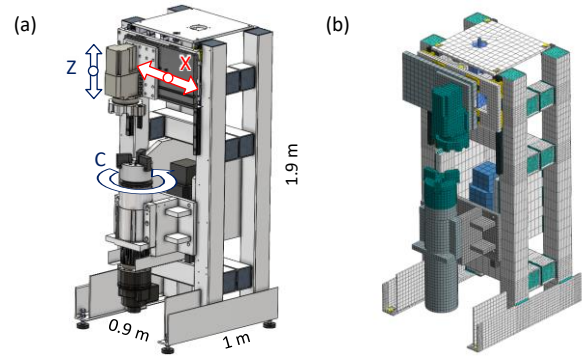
Vertical lathe with steel-polymer concrete frame: structural loop (a) and finite element model (b).
